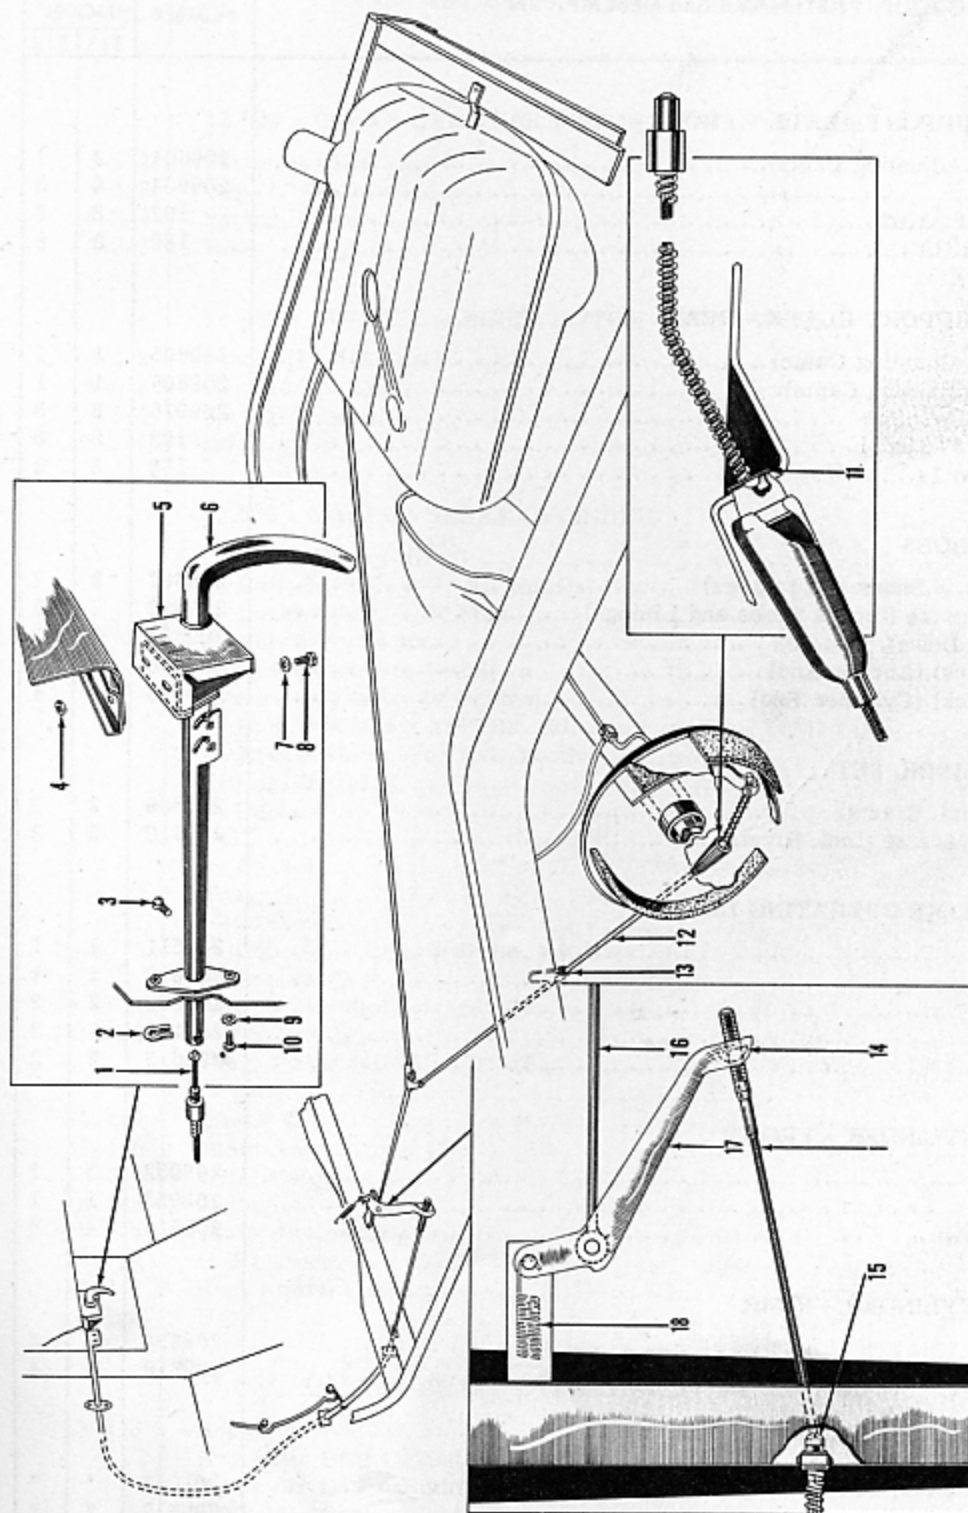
HAND BRAKE LINKAGE—EXPLODED VIEW
